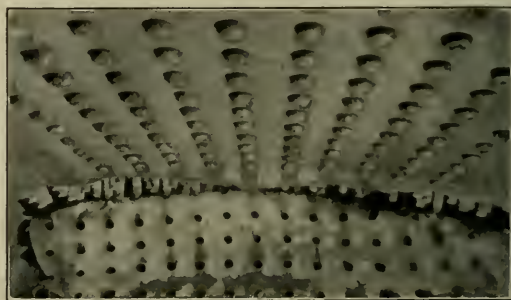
Failure of Autogenously Welded Crown Sheet
